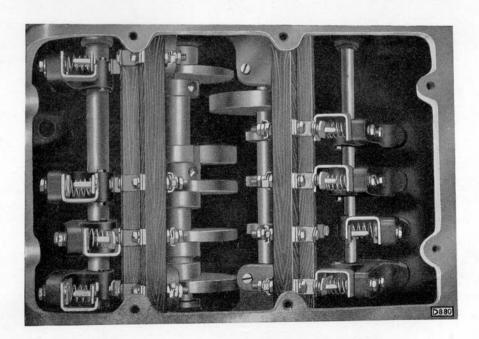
Gearbox and final drive controllers showing electrical contacts.
